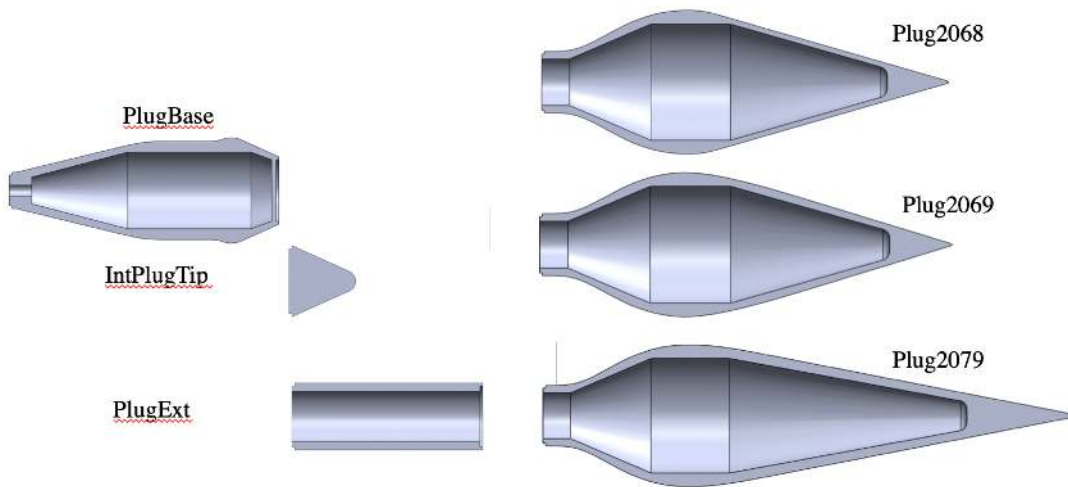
Plug components: PlugBase (common), IntPlugTip (internal plug), short plug with shock (plug2068), short plug without shock (plug2069), long plug (p2079), PlugExt is used for long plug configuration only [14]
